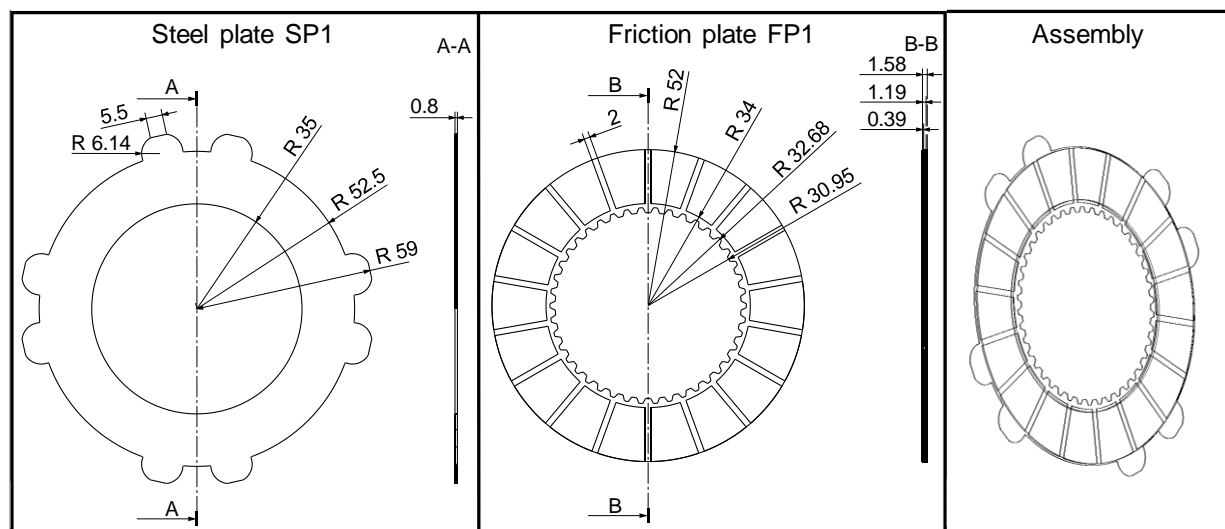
Technical drawings of the steel palte SP1 and friction plate FP1, and the assembly [Sch22c].
